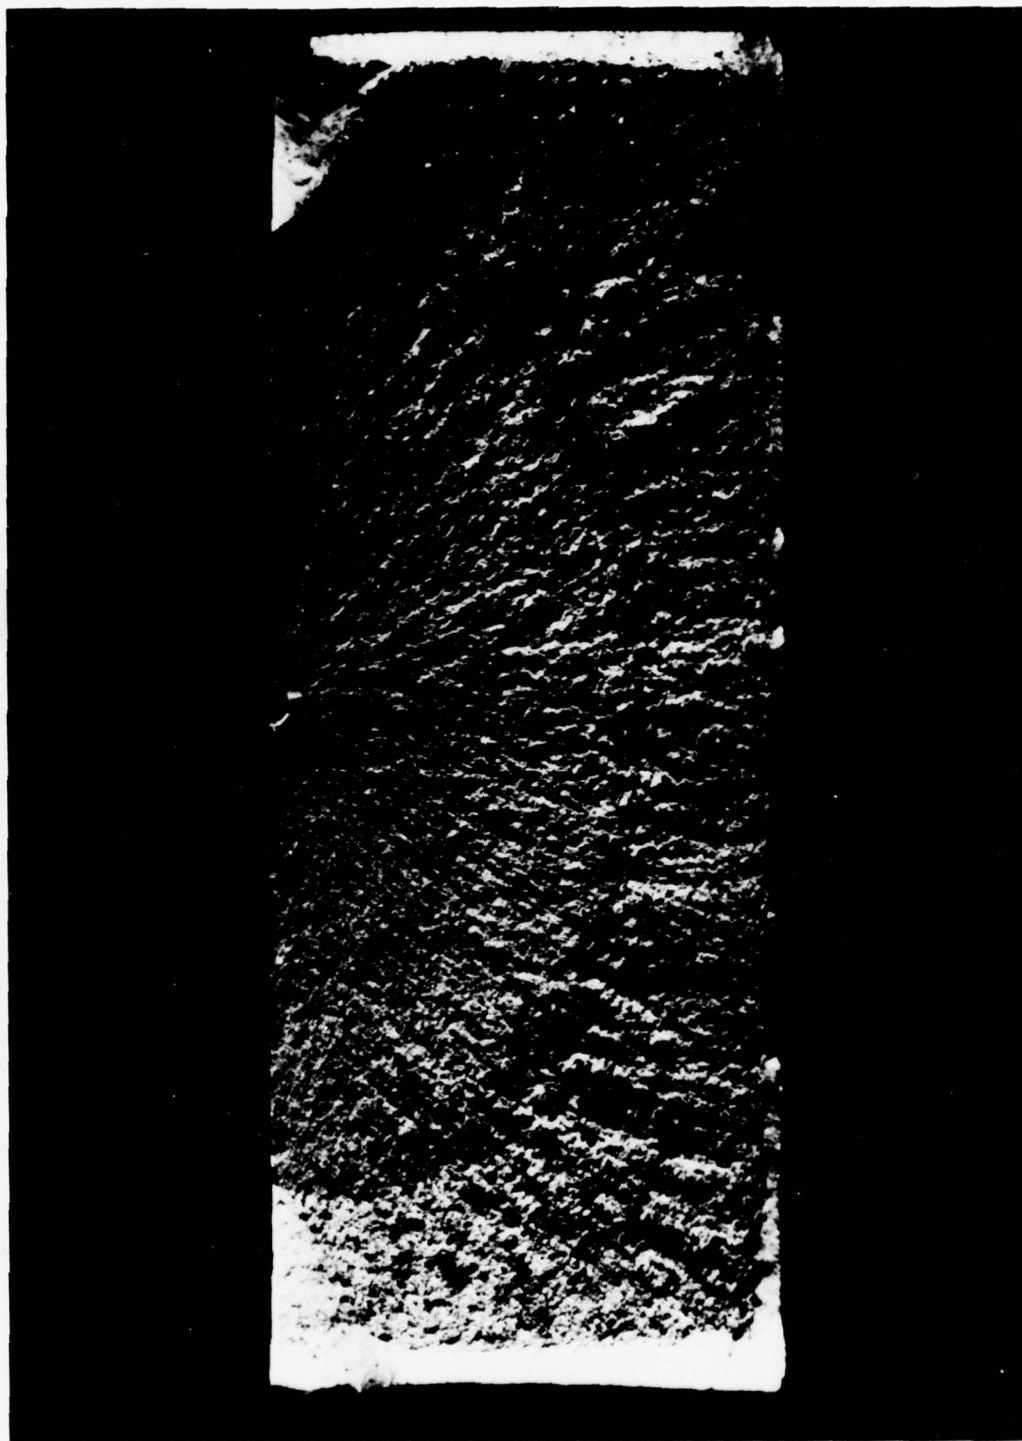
Macrofractograph for 1200°F Surface Flaw Specimen
